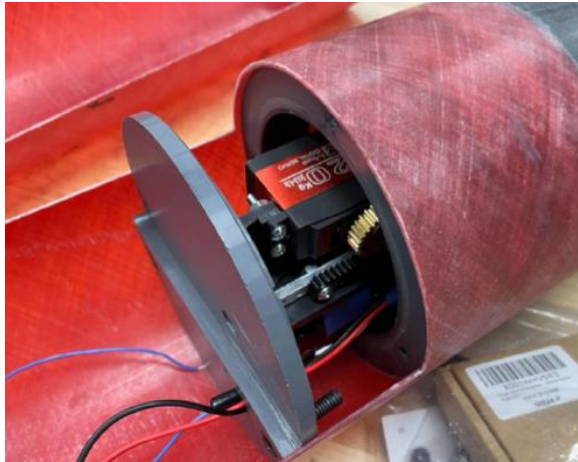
Aft Payload Bulkhead with Payload Retention System Electronics Mounted to the Aft End
